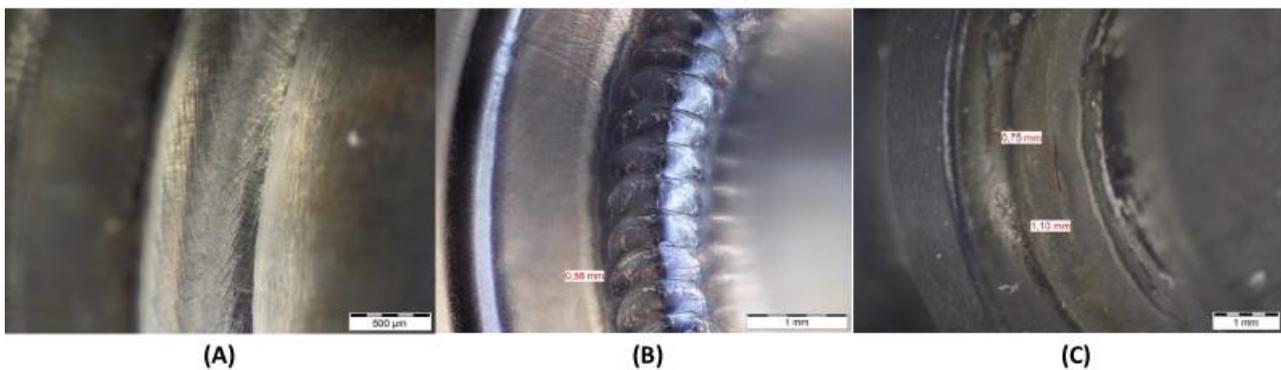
Welding cord details: surface free of cracks, (A) parameter 1, (B) parameter 2, (C) longitudinal crack on the weld surface, parameter 4 [7]
